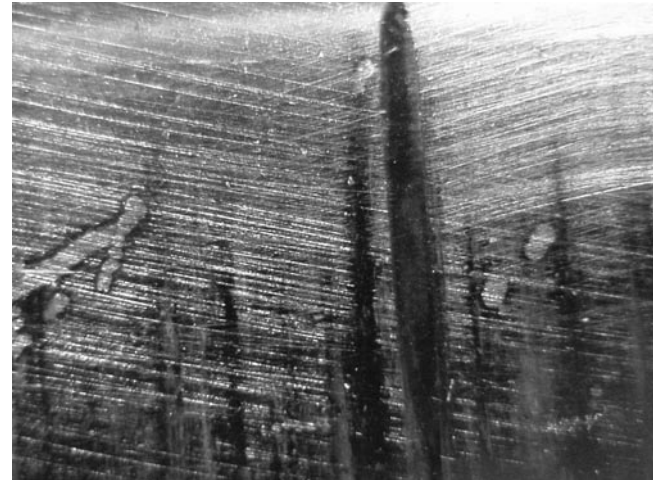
BEARING RACEWAY WITH FALSE BRINELLING DAMAGE
